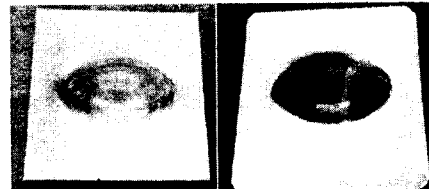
Geometry of Sheet Product to be formed by Incremental Forming
